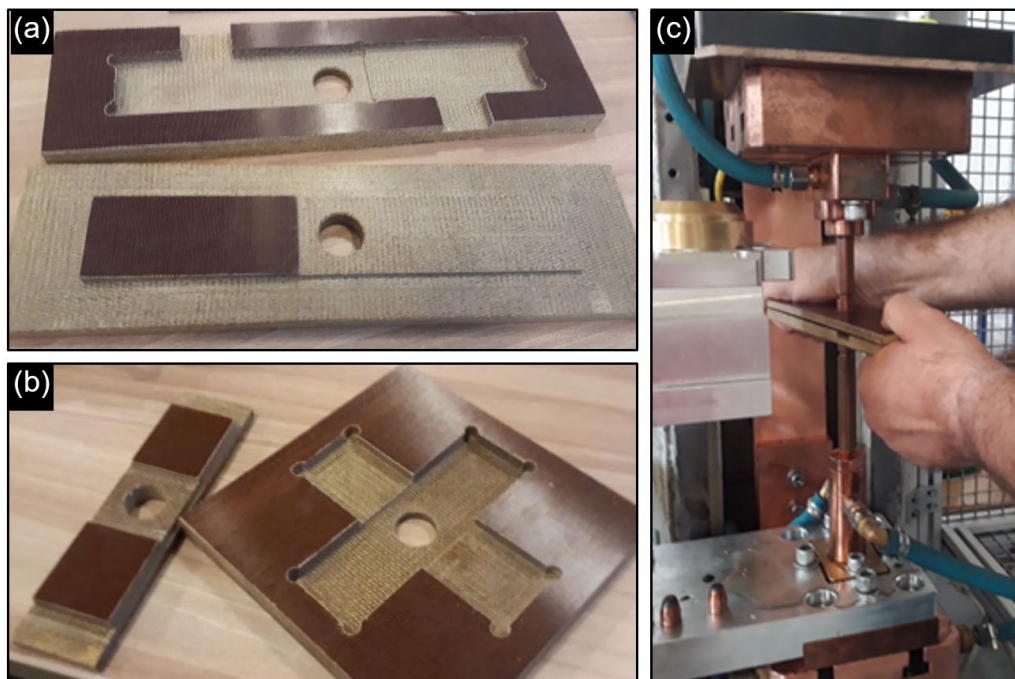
Illustration of welded joints; (a) tensile shear test and (b) cross tensile test specimen preparation, (c) tensile test set up
